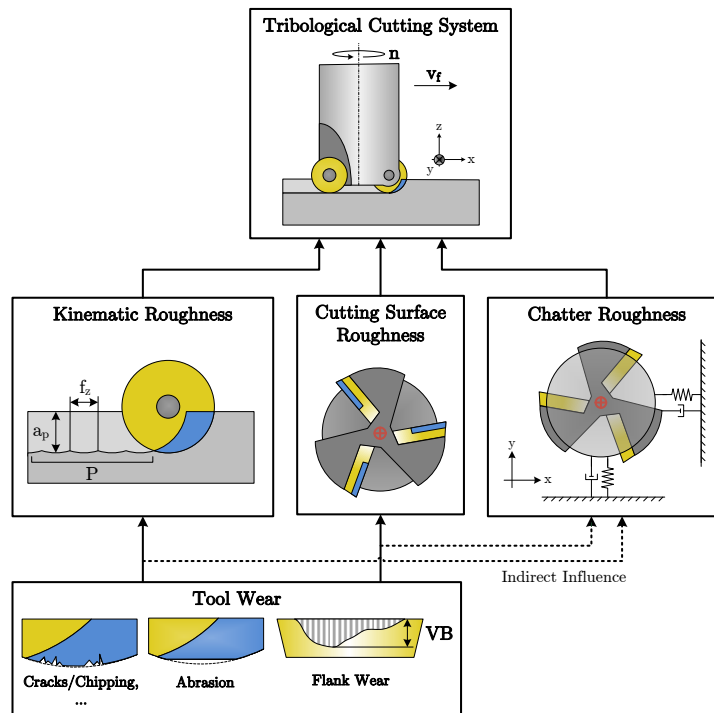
Relationship between workpiece surface quality and tool wear in the milling process.
